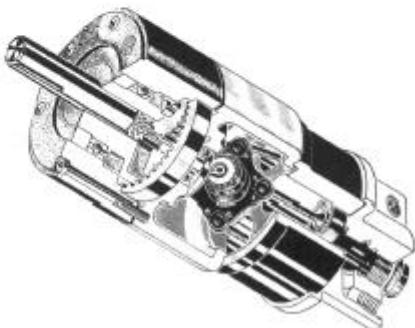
Axial piston air motor. (Courtesy of Gardner-Denver Co.,
